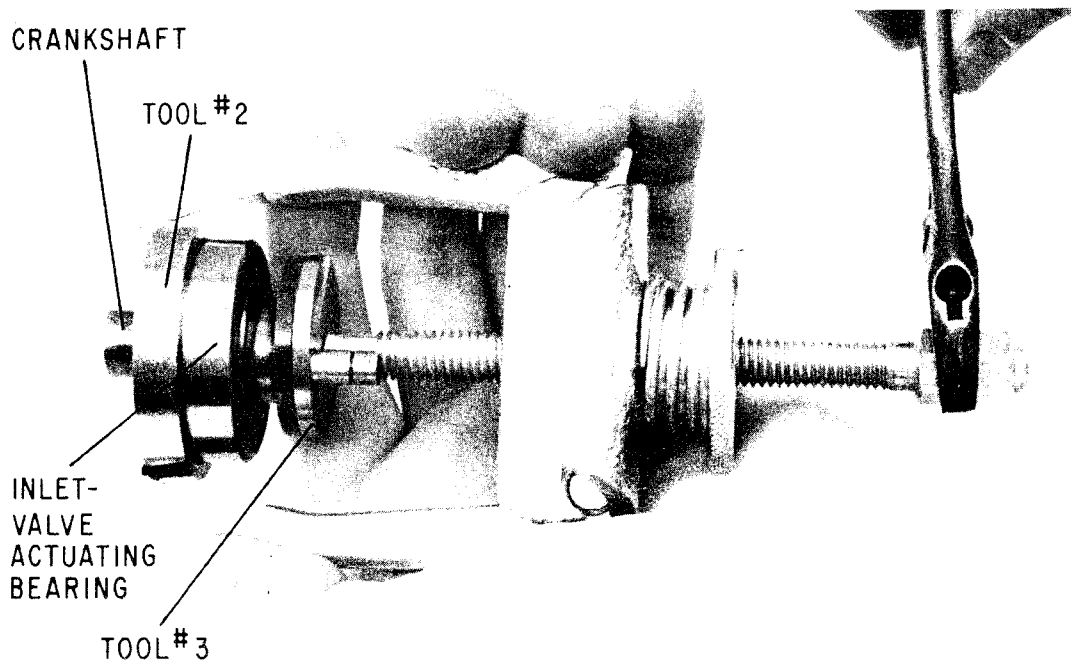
INSTALLING THE INLET-VALVE ACTUATING BEARING
